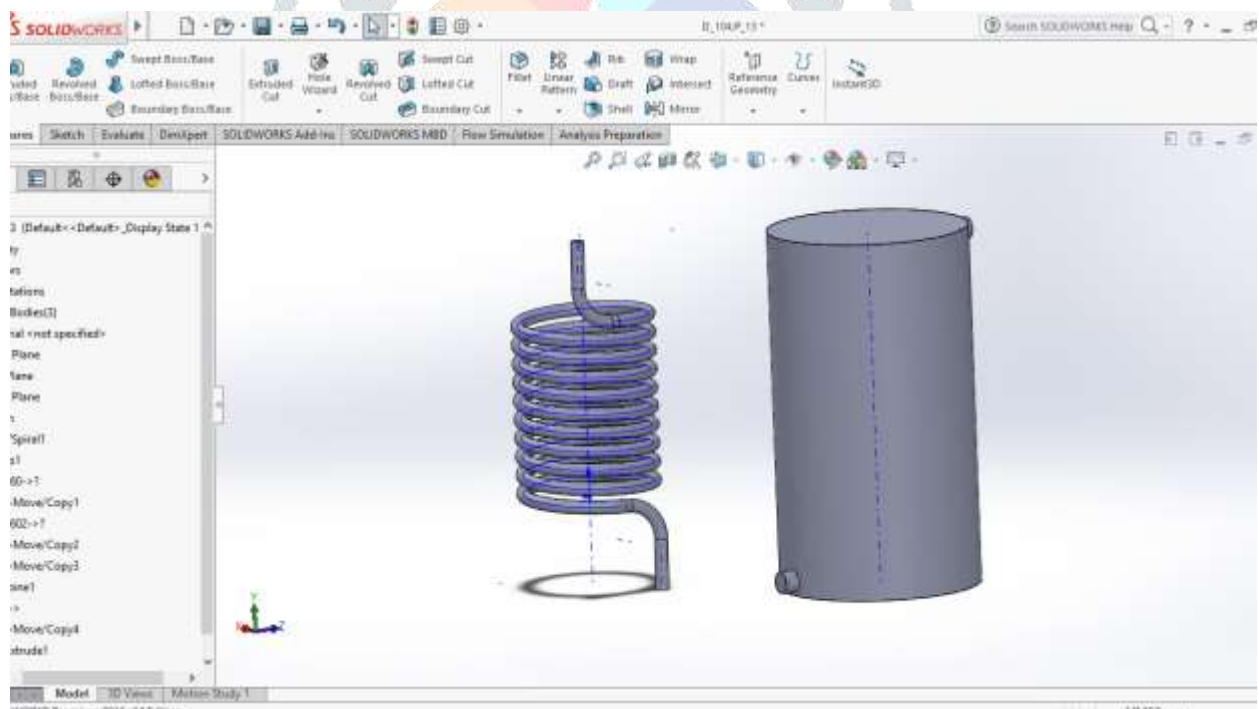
Design of coiled tube heat exchanger with Solidworks 16
